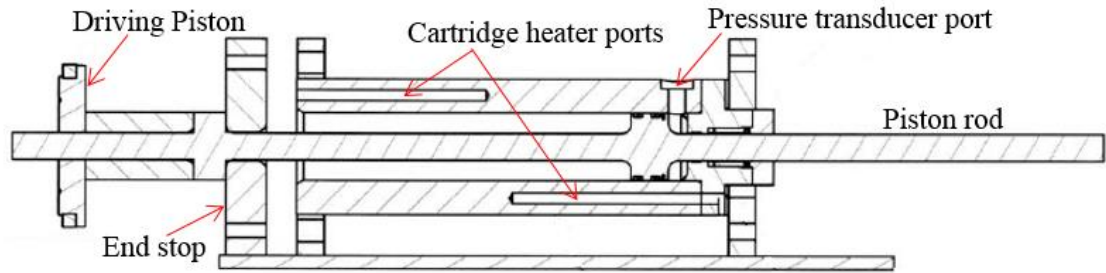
Section view of combustion cylinder. [Ezevard, 2011]
